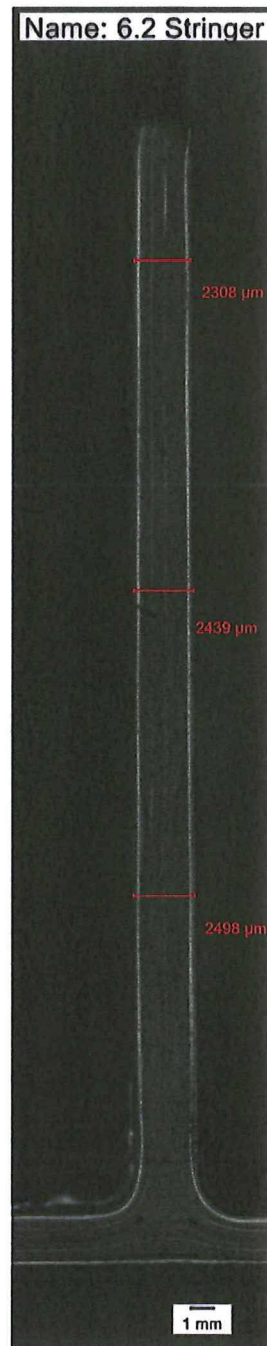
Cross section of panel 7 stringer 2b skin
